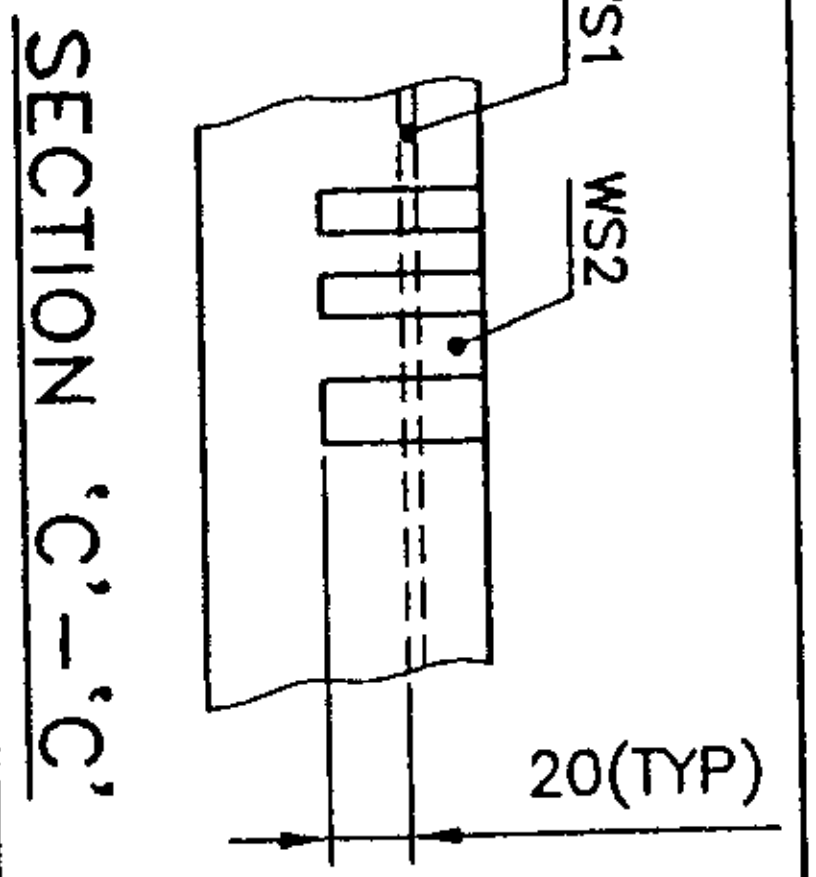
SCHEMATIC LAYOUT OF SPECIMEN LOCATION WITH WELD THICKNESS 20 MM (FIRST LAYER E309Nb-15 AND SUBSEQUENT LAYERS OF E347-15) (REFER TABLE 1 FOR SPECIMEN SIZES)
